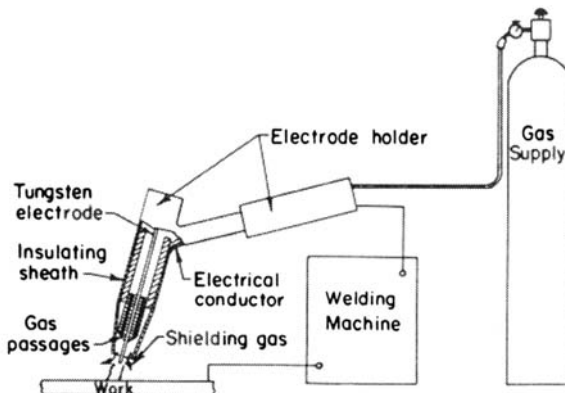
Equipment for gas tungsten arc welding (GTA).
